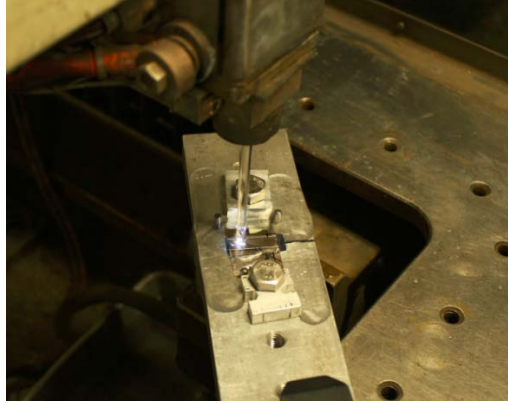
EDM (Electric discharge machining) cutting the tensile coupon from the pre-strained specimen which is  $45^\circ$  to the pre-strained direction.
